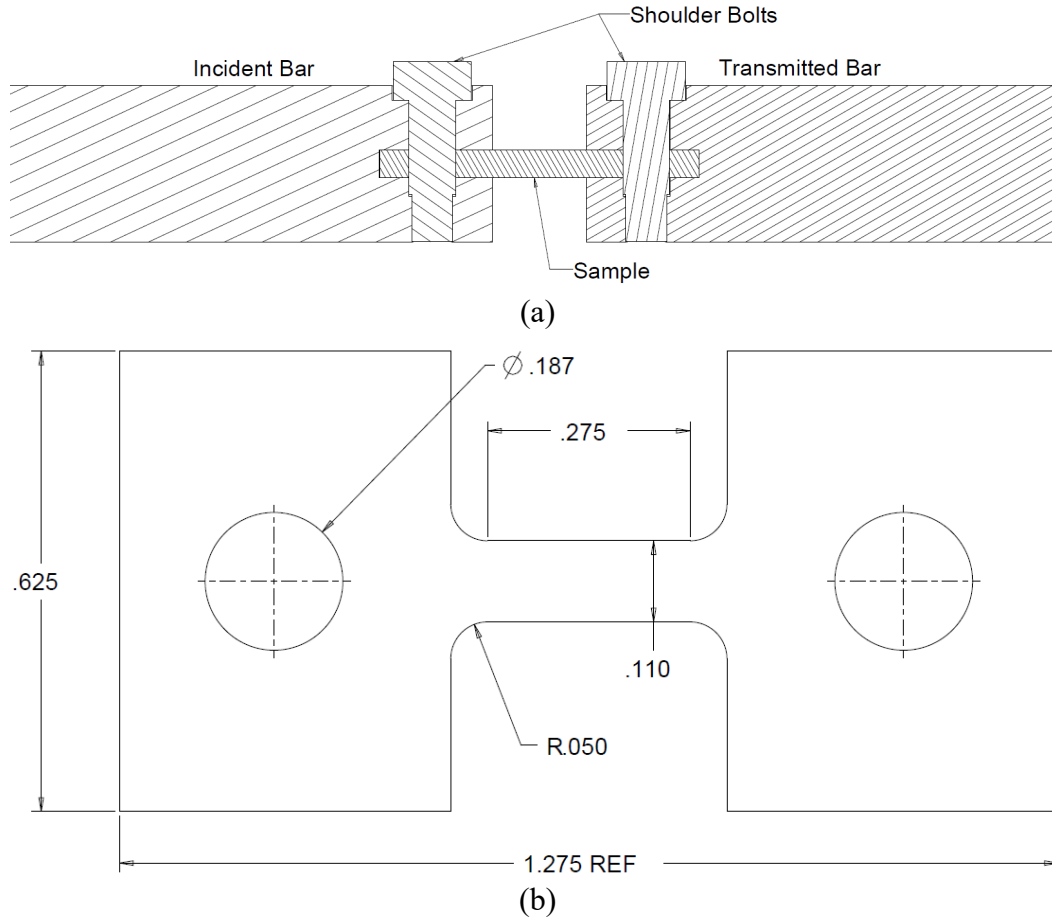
(a) Cross-sectional view of sample gripping in the tension Kolsky bar. (b) Engineering drawing of tension Kolsky bar samples (all units in inches).
